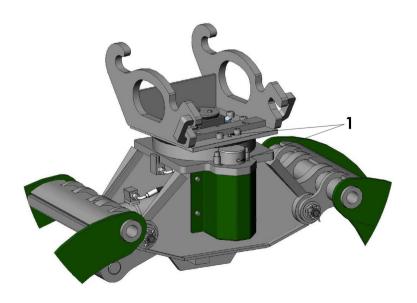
Lubricating cylinder bearing 1 = Lubricate 1 x per 8 operating hours.
